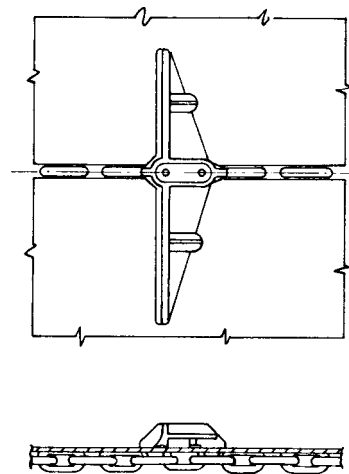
Scraper flight with welded chain.
